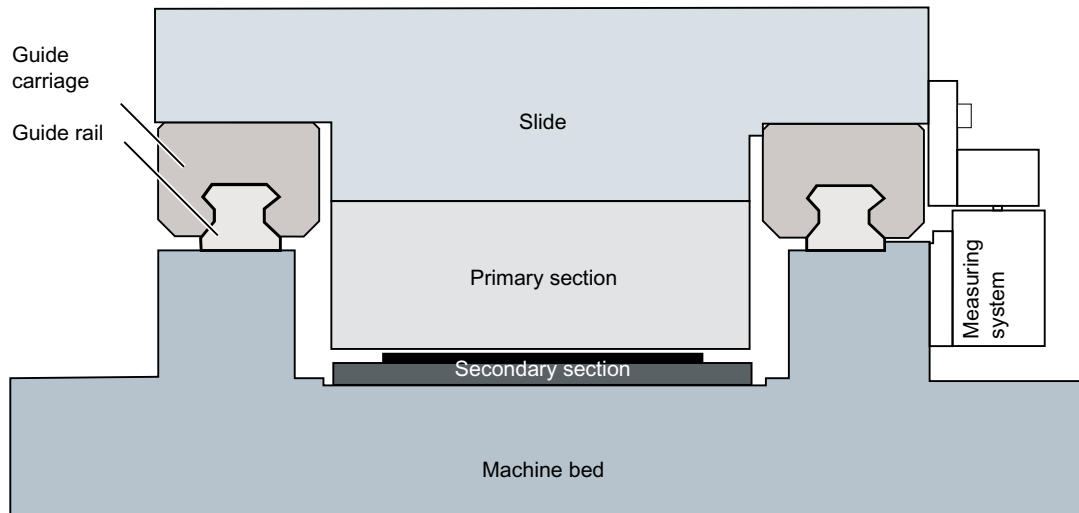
Typical installation situation of a single-sided linear motor with moved primary section
